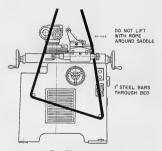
A Lifting a CINCINNATI No. 2 Cutter and Tool Grinder
